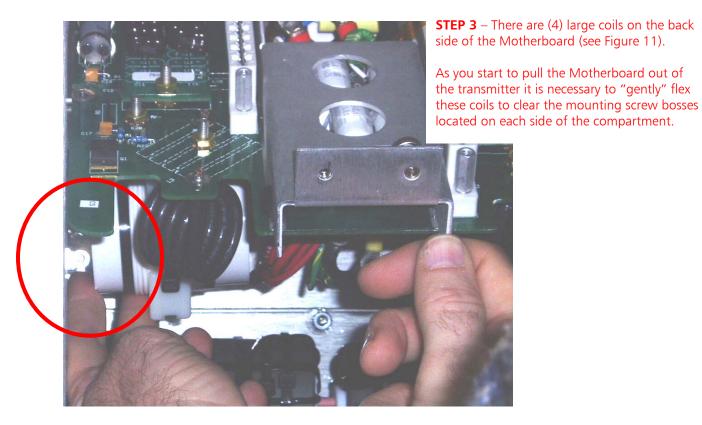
Gently Flex Coils (both sides) to Clear Mounting Screw Bosses
